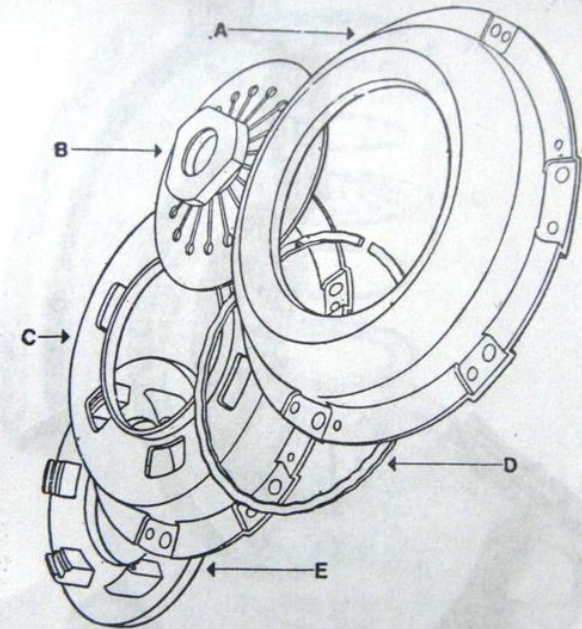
Exploded view of a diaphragm spring type clutch. A—Cover, B—Diaphragm spring, C—clutch plate (friction plate), D—retaining spring, E—pressure plate. (Courtesy—Laycock Engineering Ltd., England)
